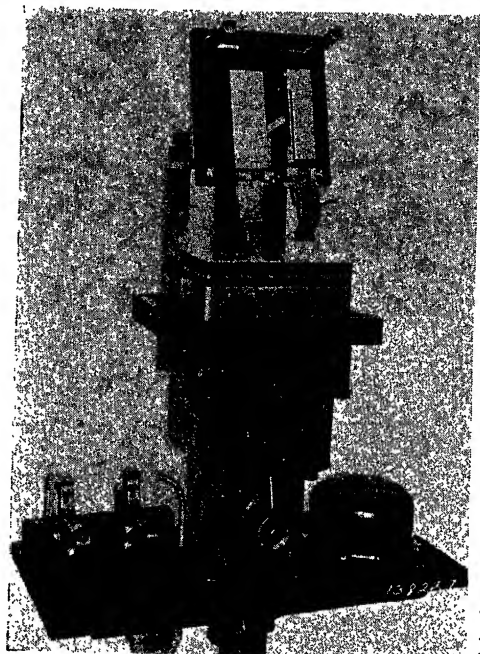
BUTT WELDER FOR 0.011 PERMALLOY WIRE
